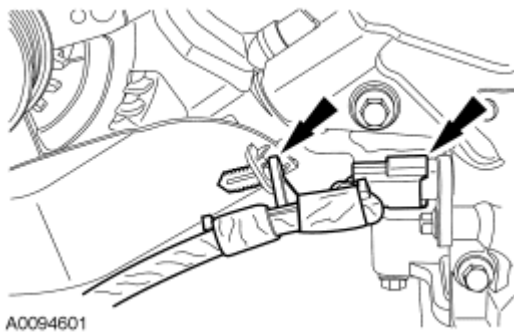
Locating Crankshaft Position Sensor (CKP) Electrical Connector & Wiring Retainers
